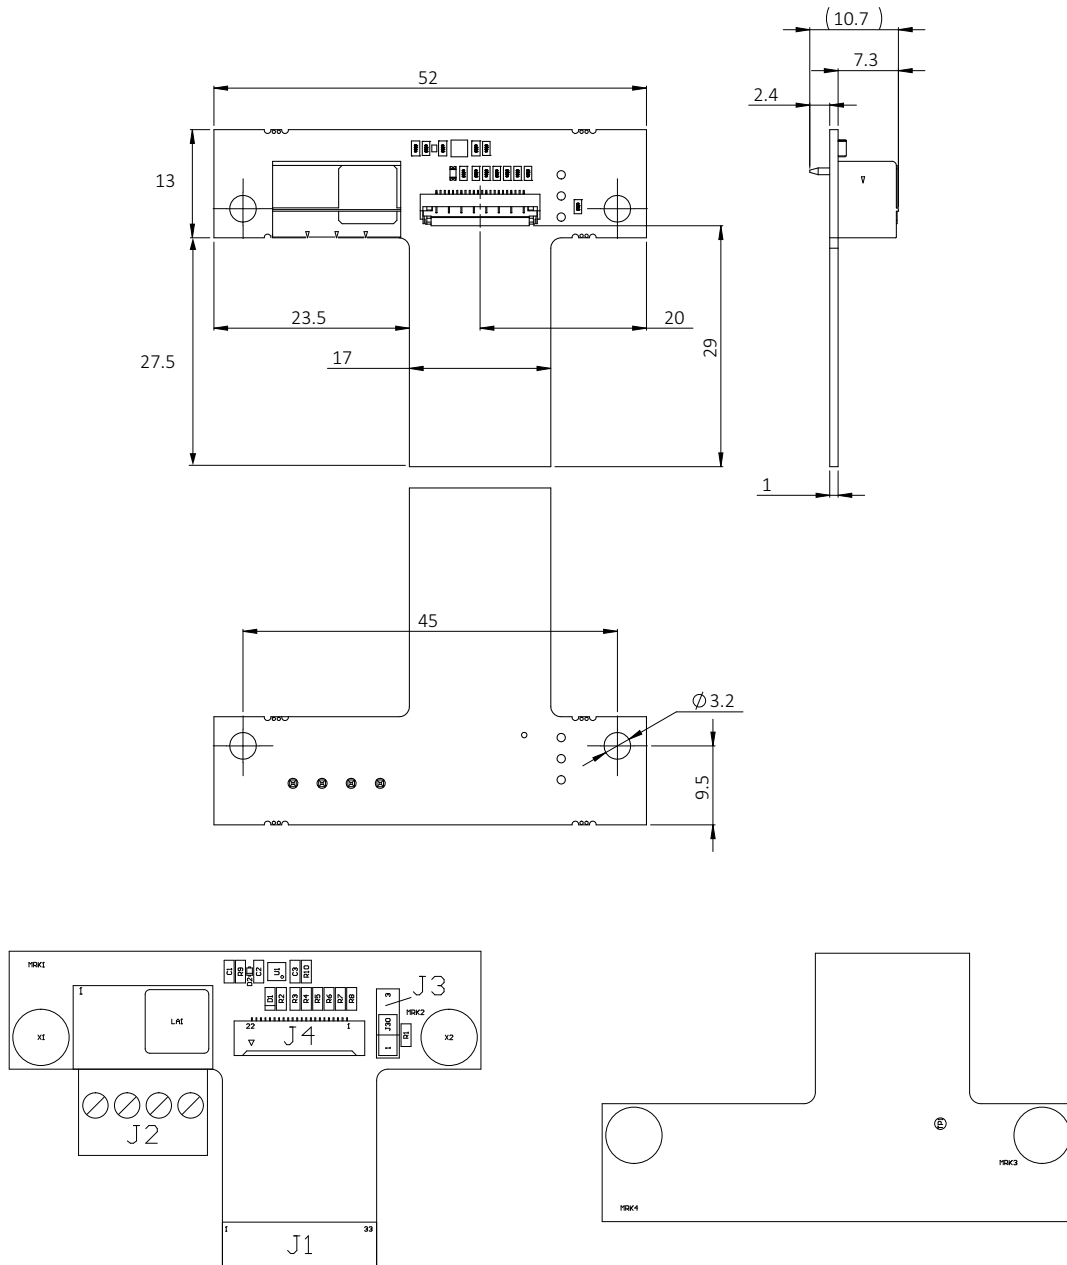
Adapter for Wandboard i.MX6 dimensions and PCB layout
